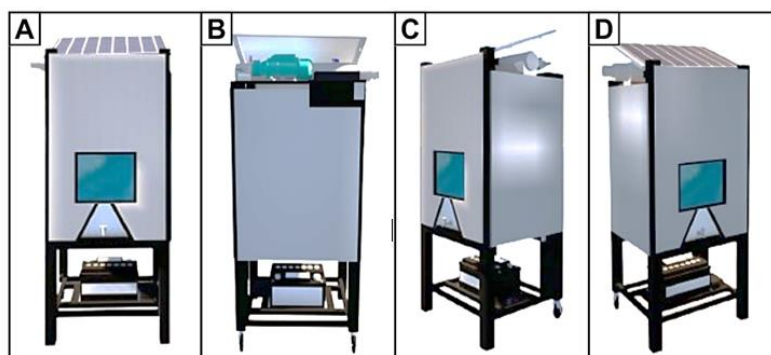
Digital Sketch of the Solar-Powered Water Purification System. A. Front elevation, B. Rear elevation, C. Right side elevation, D. Left side elevation
